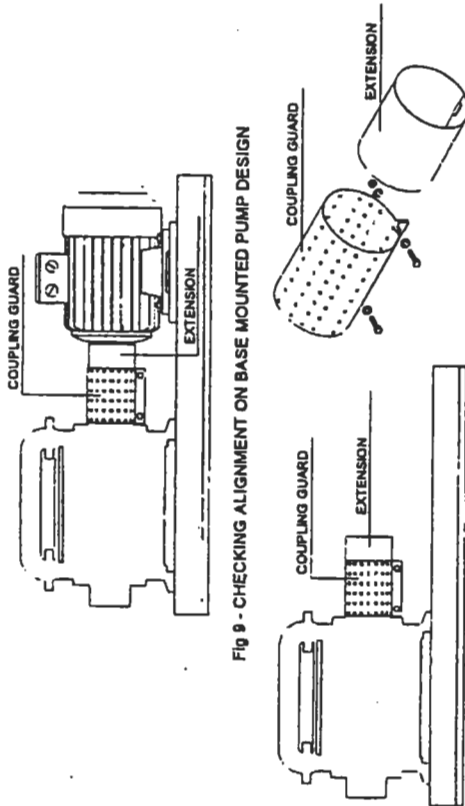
CHECKING ALIGNMENT ON BASE MOUNTED PUMP DESIGN
